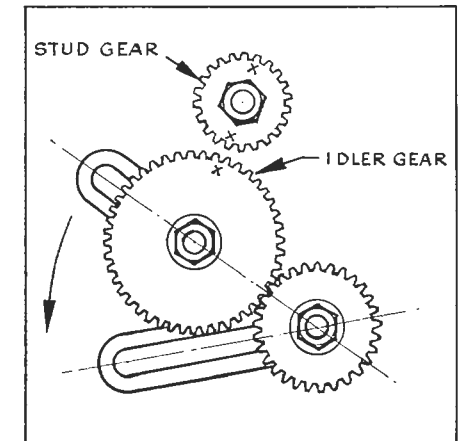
Spacing a Two Start Thread by slipping the Change Gears
